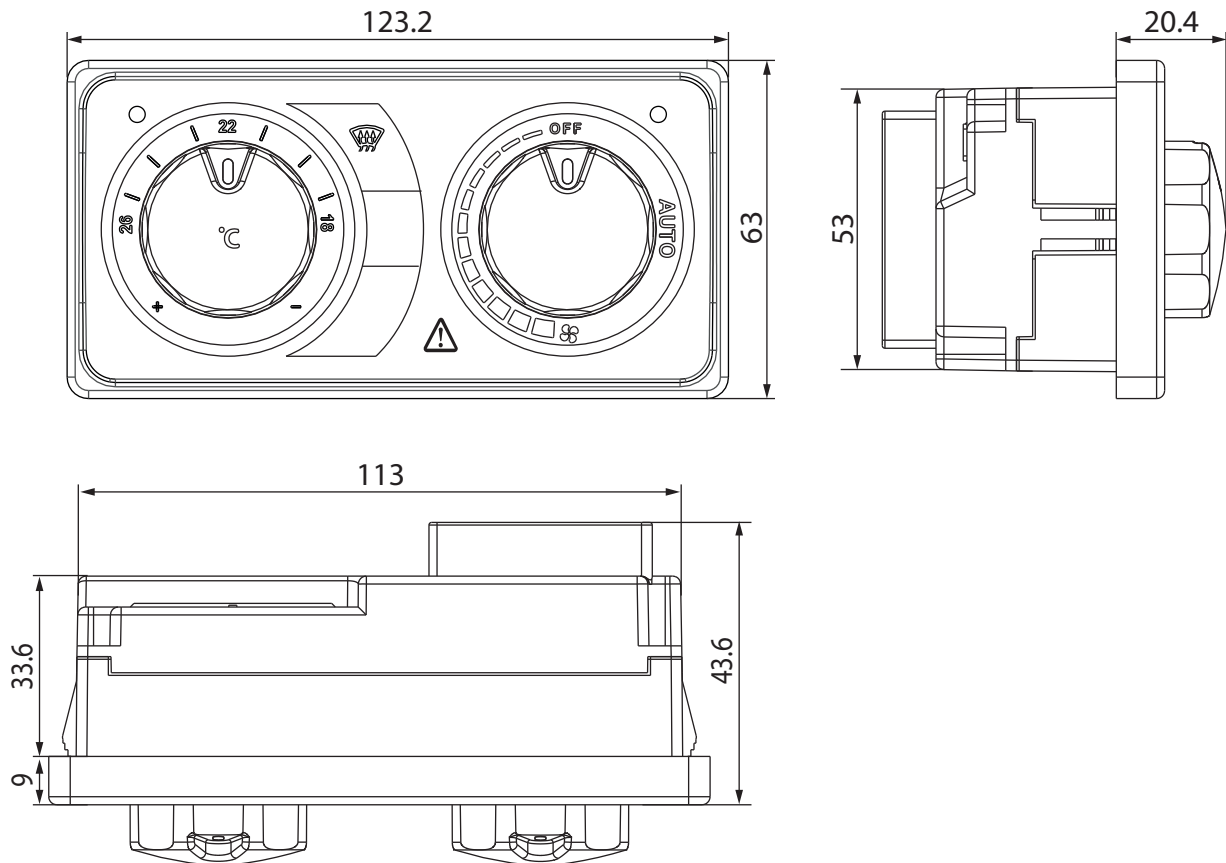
Dimension drawing, heater and ventilation control unit (dimensions in mm)
